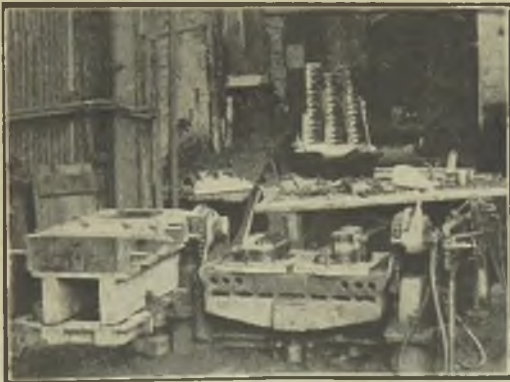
TWO-BORE LORRY CYLINDER-PATTERN PLATES MOULDED IN PAIRS ON OSBORN MACHINE.
